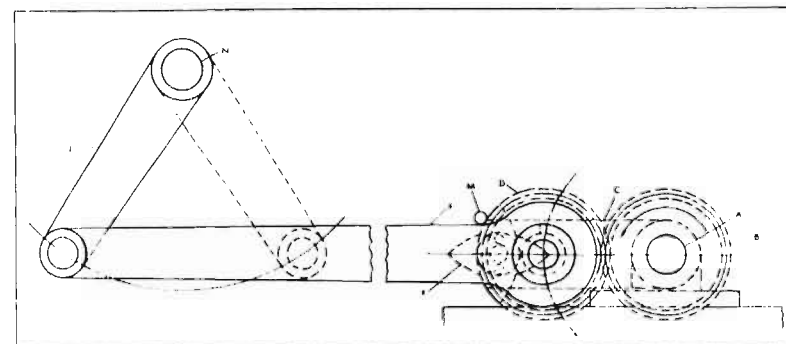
Front view of intermittent speed-change linkage mechanism in which *N* is the reciprocating driven shaft and *A* is the drive. Gear *B* turns constantly, but at points in a cycle gear is locked by a clutch, causing the whole mechanism to rotate around shaft *A*.
